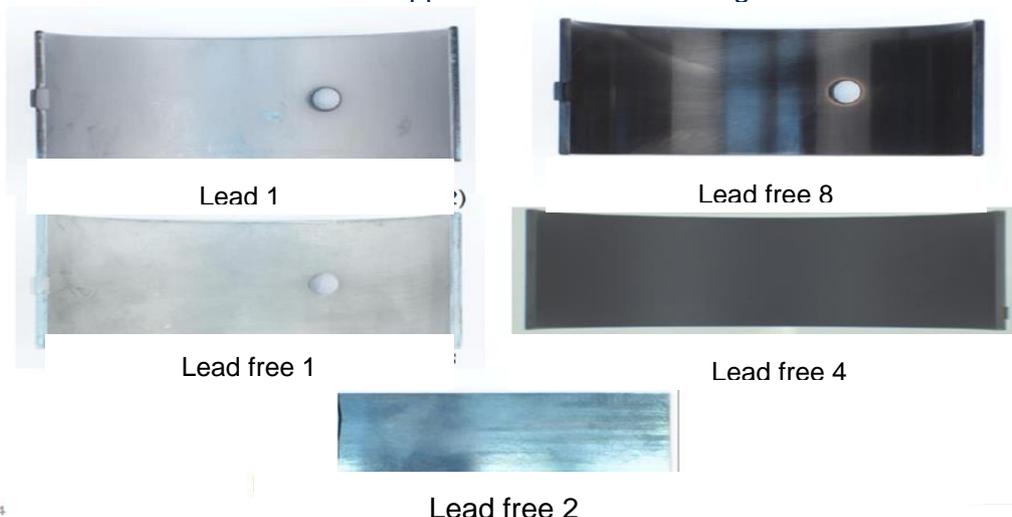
Inner surfaces of examples unused lead-based and lead-free bearings
